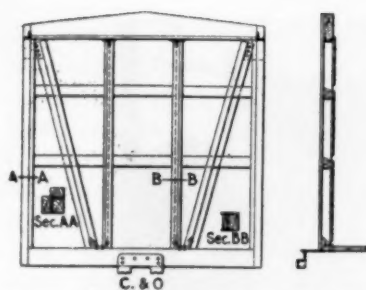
STEEL END FRAMING USED ON C. & O. CARS WITH I-BEAM CENTER POSTS; DIAGONAL BRACES RUN FROM END SILL AT CENTER POSTS TO END PLATE
